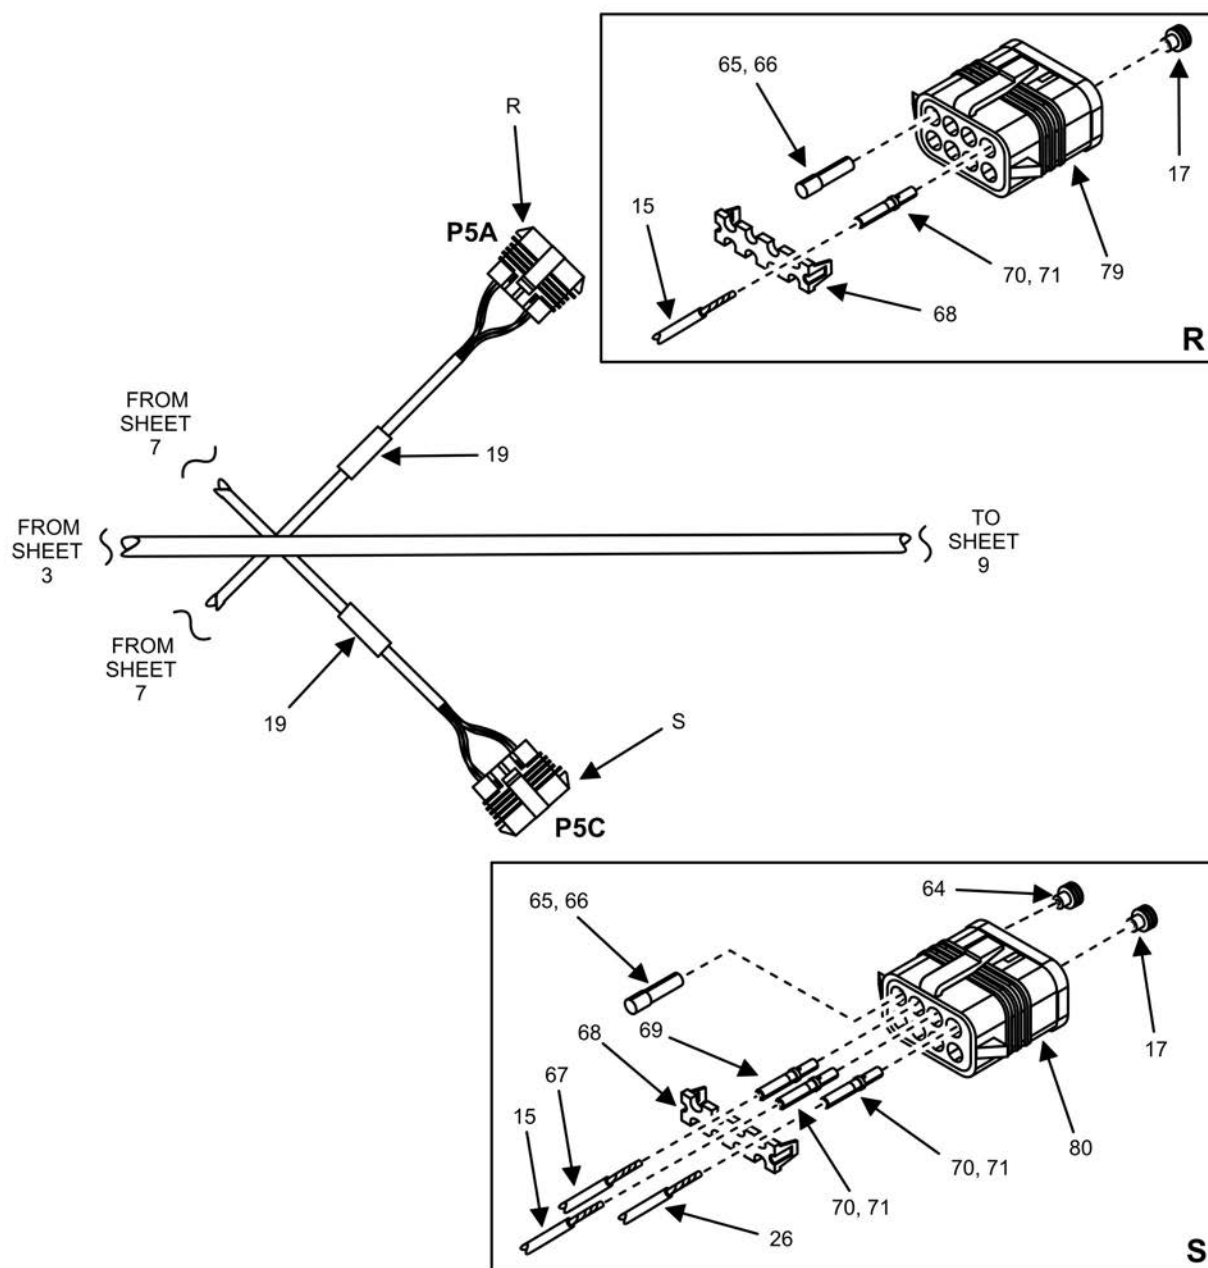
Engine Wiring Harness (Sheet 8 of 19).
